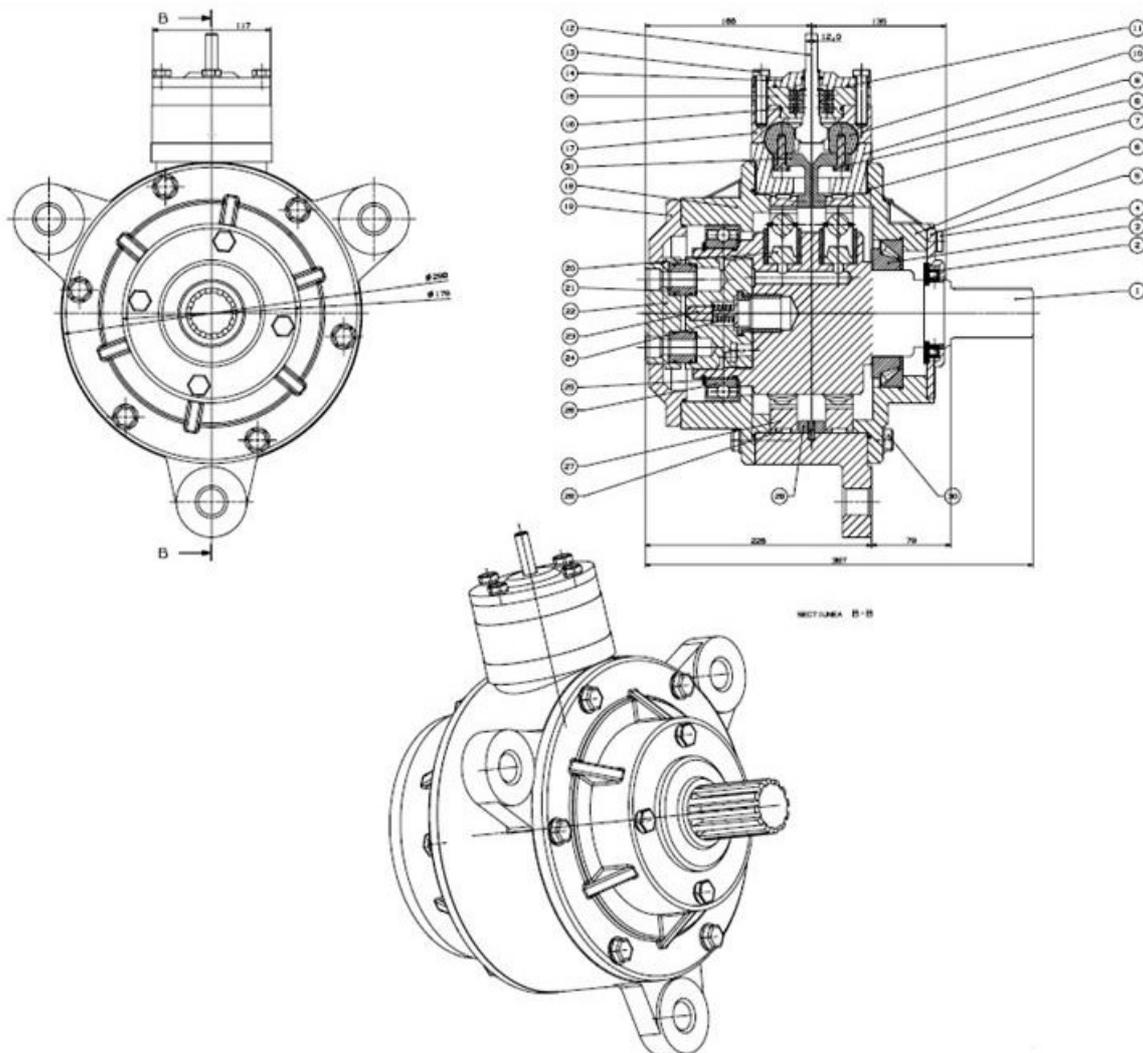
Assembly drawing of the hydrostatic engine with variable engine capacity:
